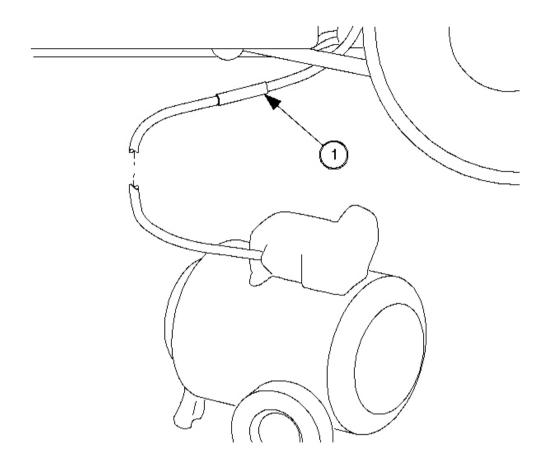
View Of Adapter From SA9127E-7 Courtesy of GENERAL MOTORS CORP.
